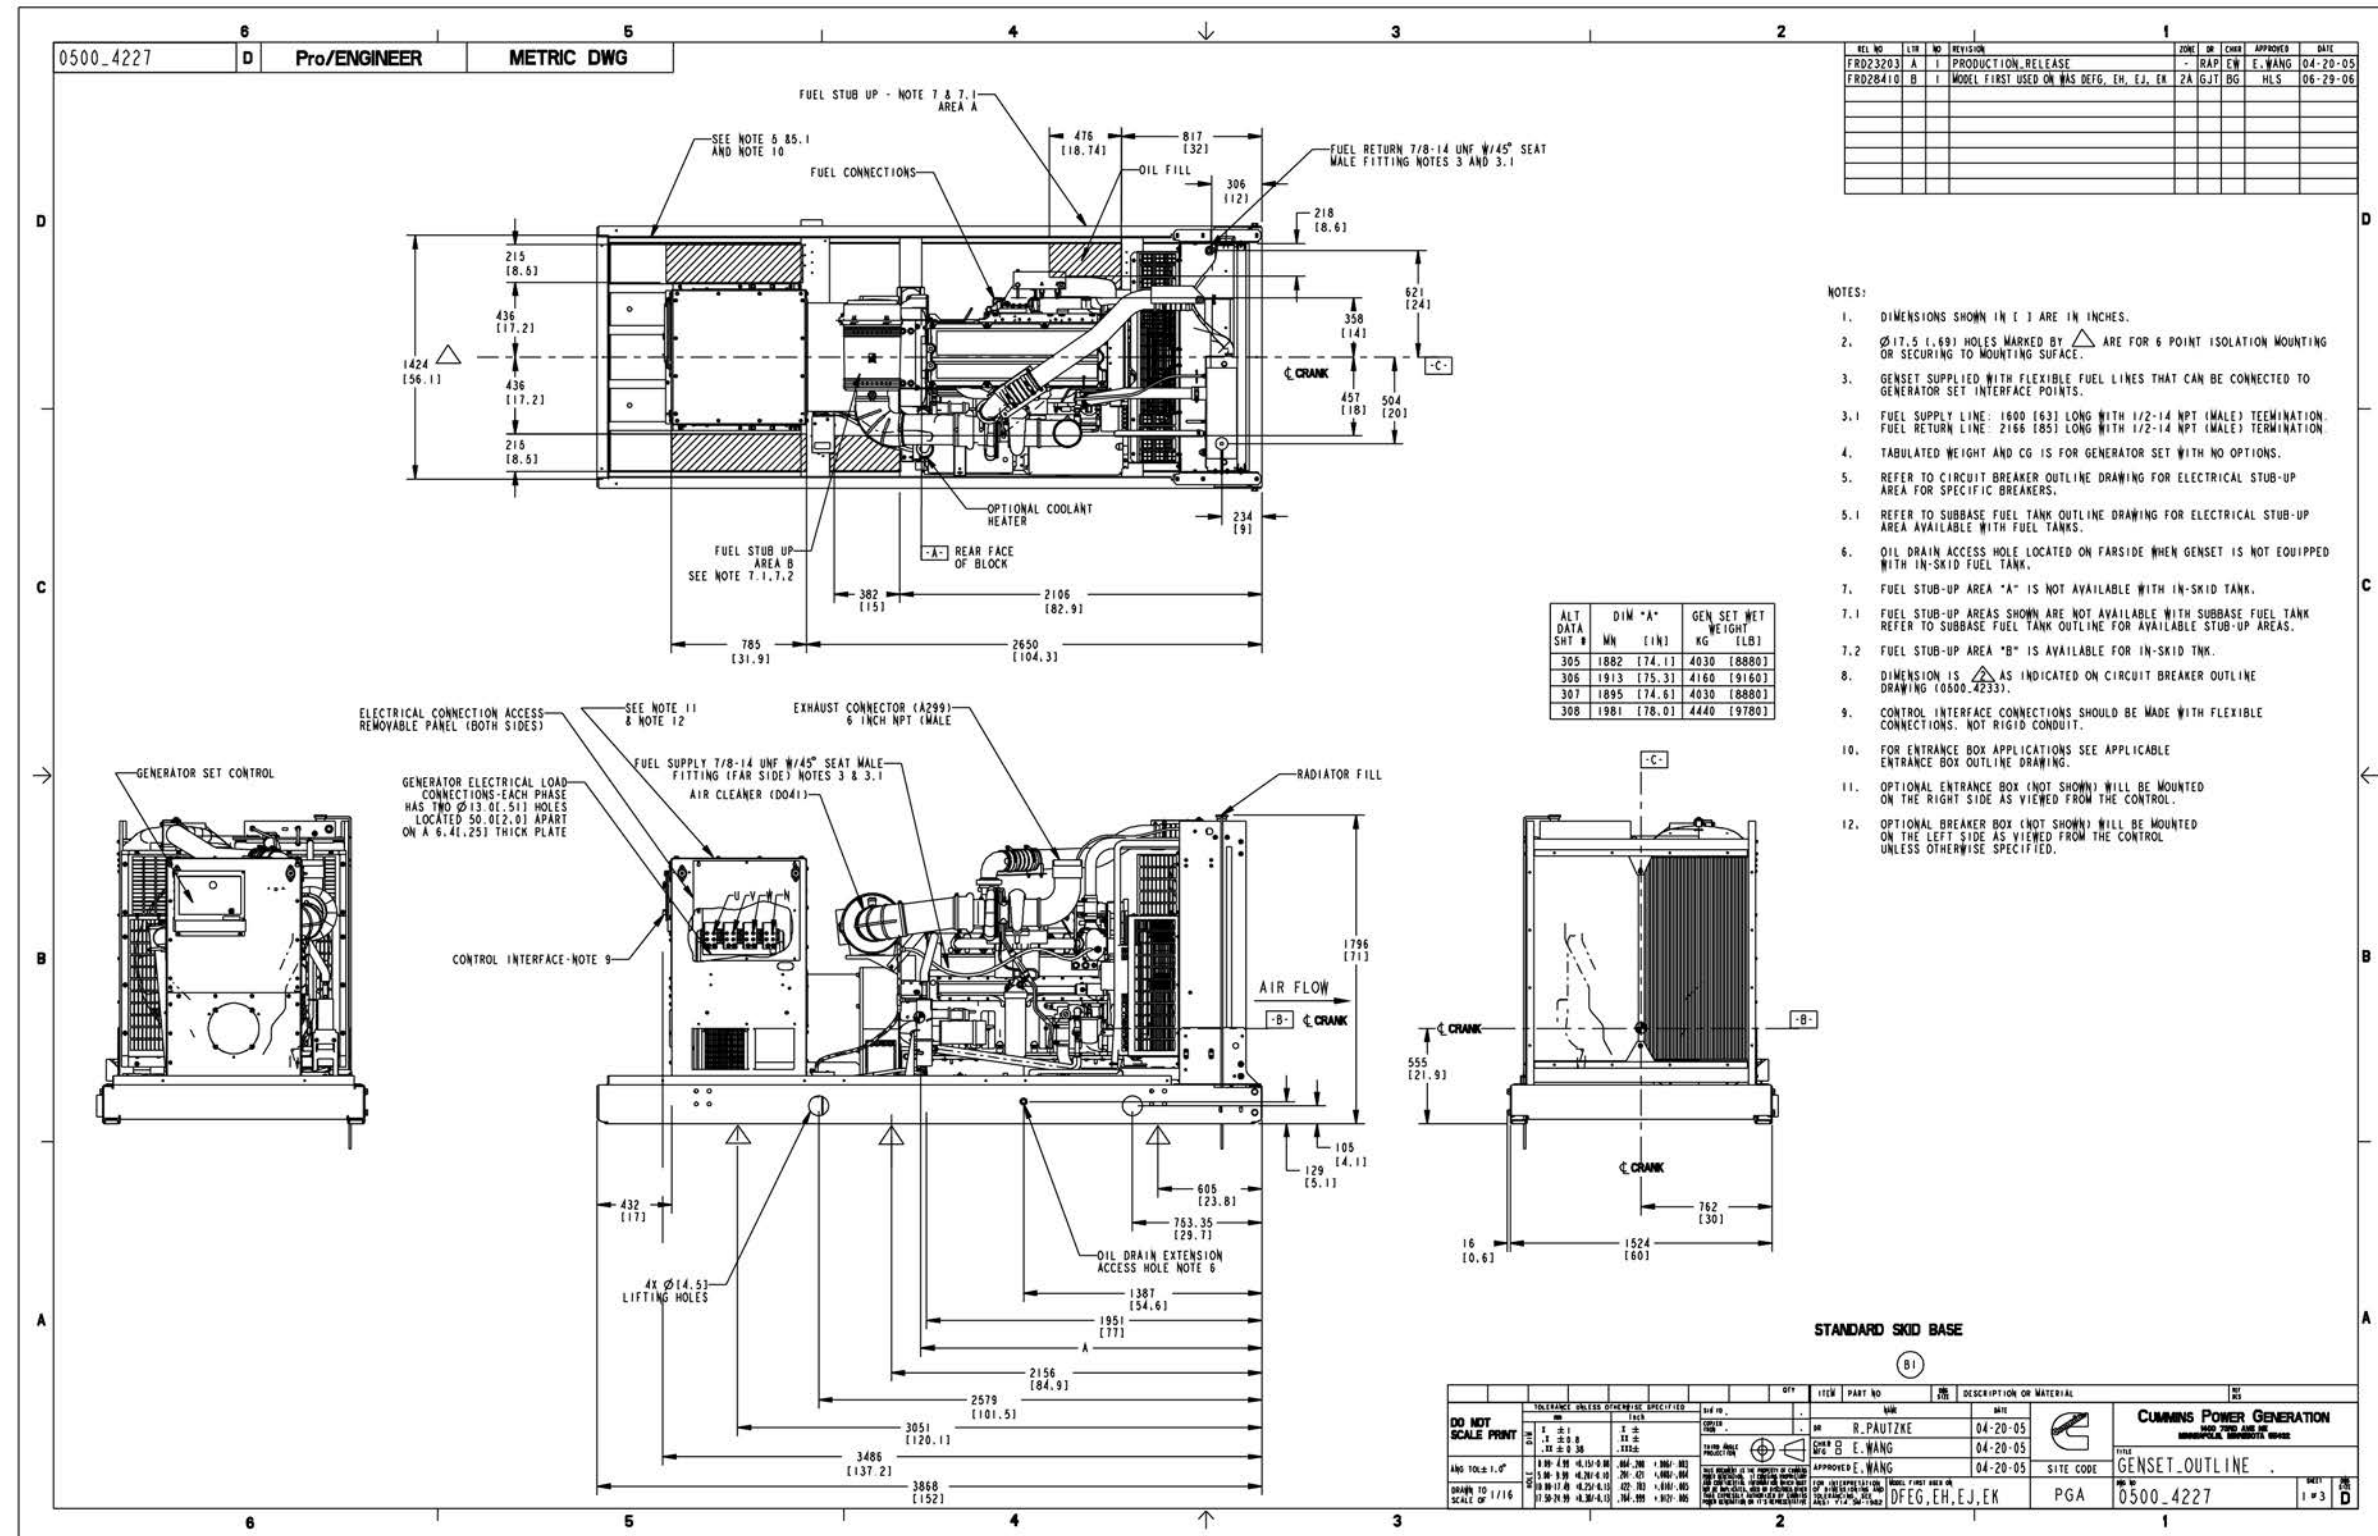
GENERATOR SET OUTLINE DRAWING (SHEET 1)
